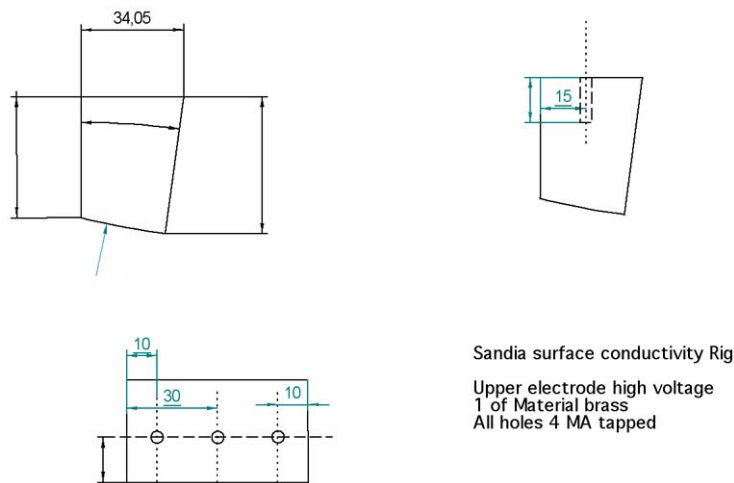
Design of electrodes for contact with inner surface of switch housing for surface conductivity measurements.
